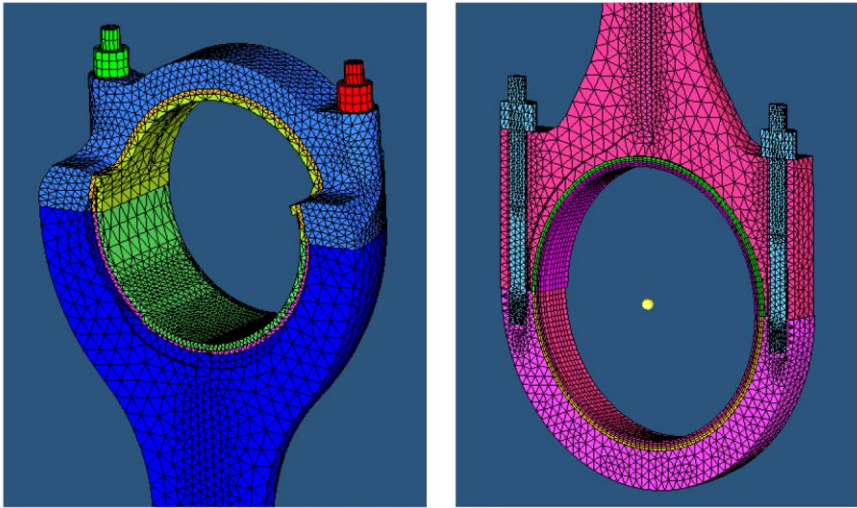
FEM-models of crosshead bearing (left) and crank pin bearing (right).
